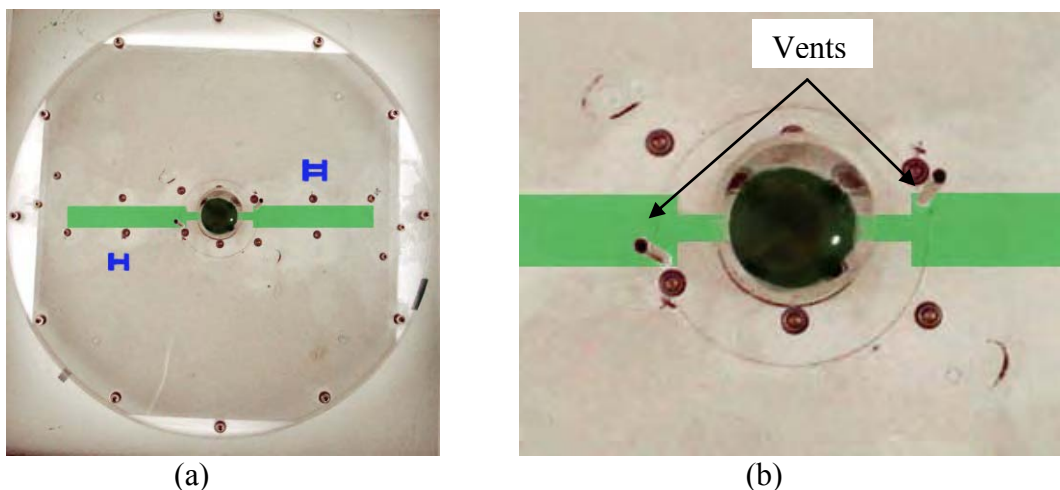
22 Assembly for (a) direct gated mould and (b) close-up showing position of vents.
